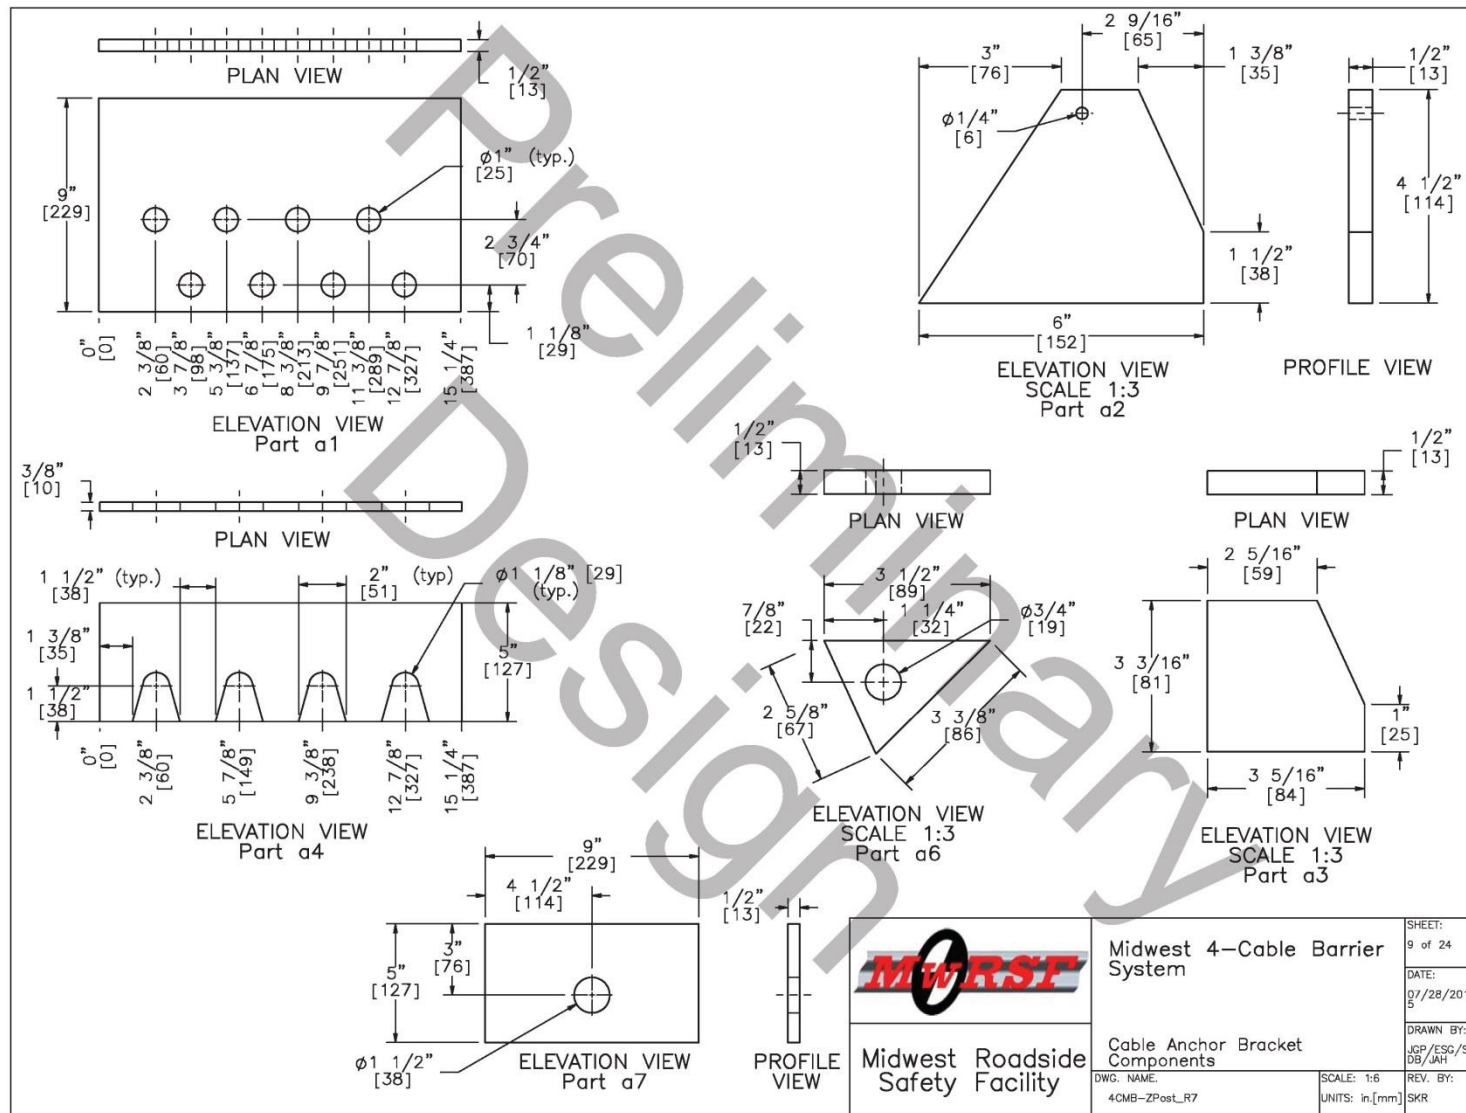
Cable Anchor Bracket Components, Test No. MWP-1
